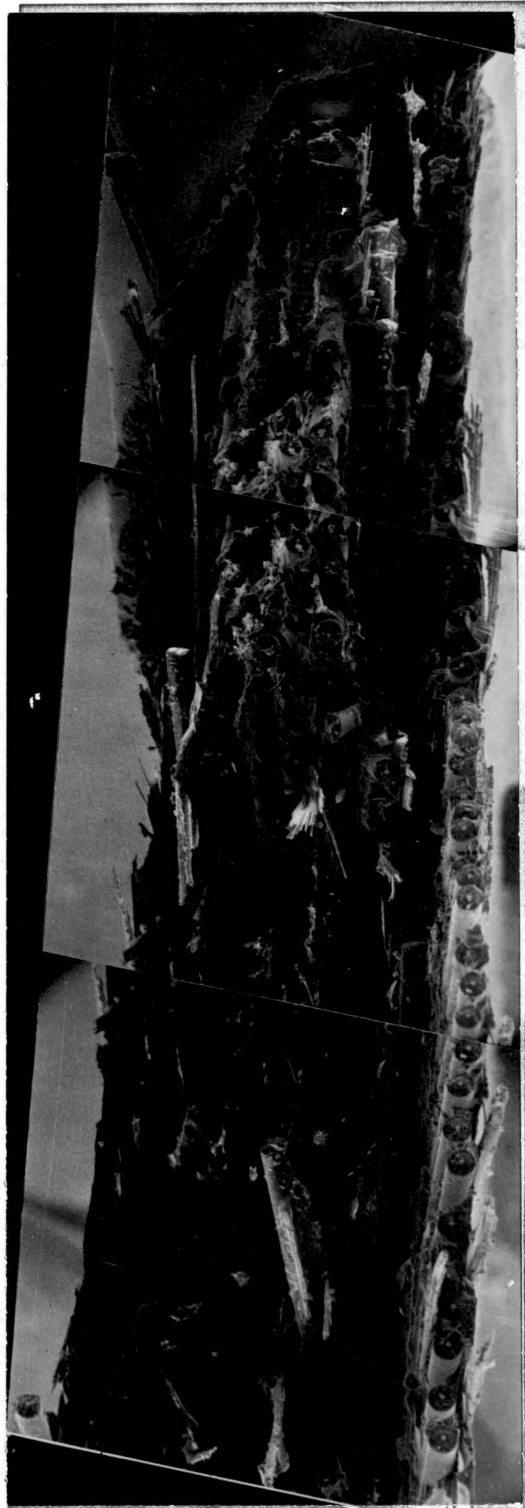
B/Ep II $2\frac{1}{2}$ Hz fatigue horizontal fracture surface.
